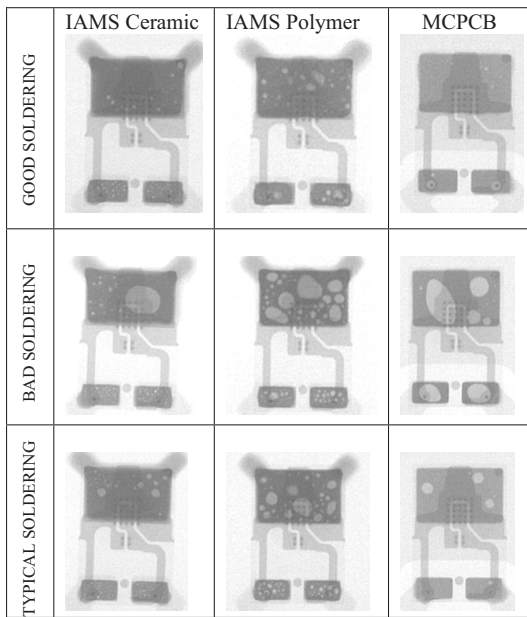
X-ray image of good soldering, bad soldering, and typical soldering of each board type.
